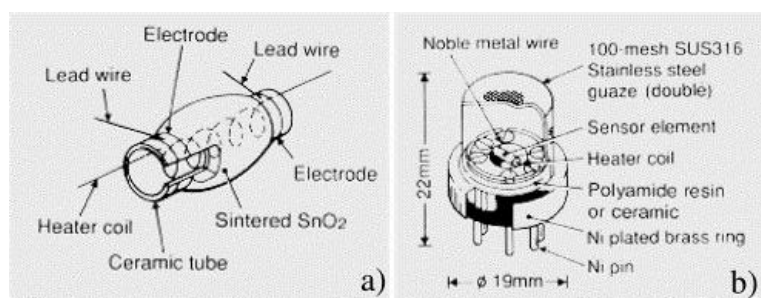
Schematic of the Taguchi-type sensor (a) Sensor Element and (b) Packaged Sensor [9].
